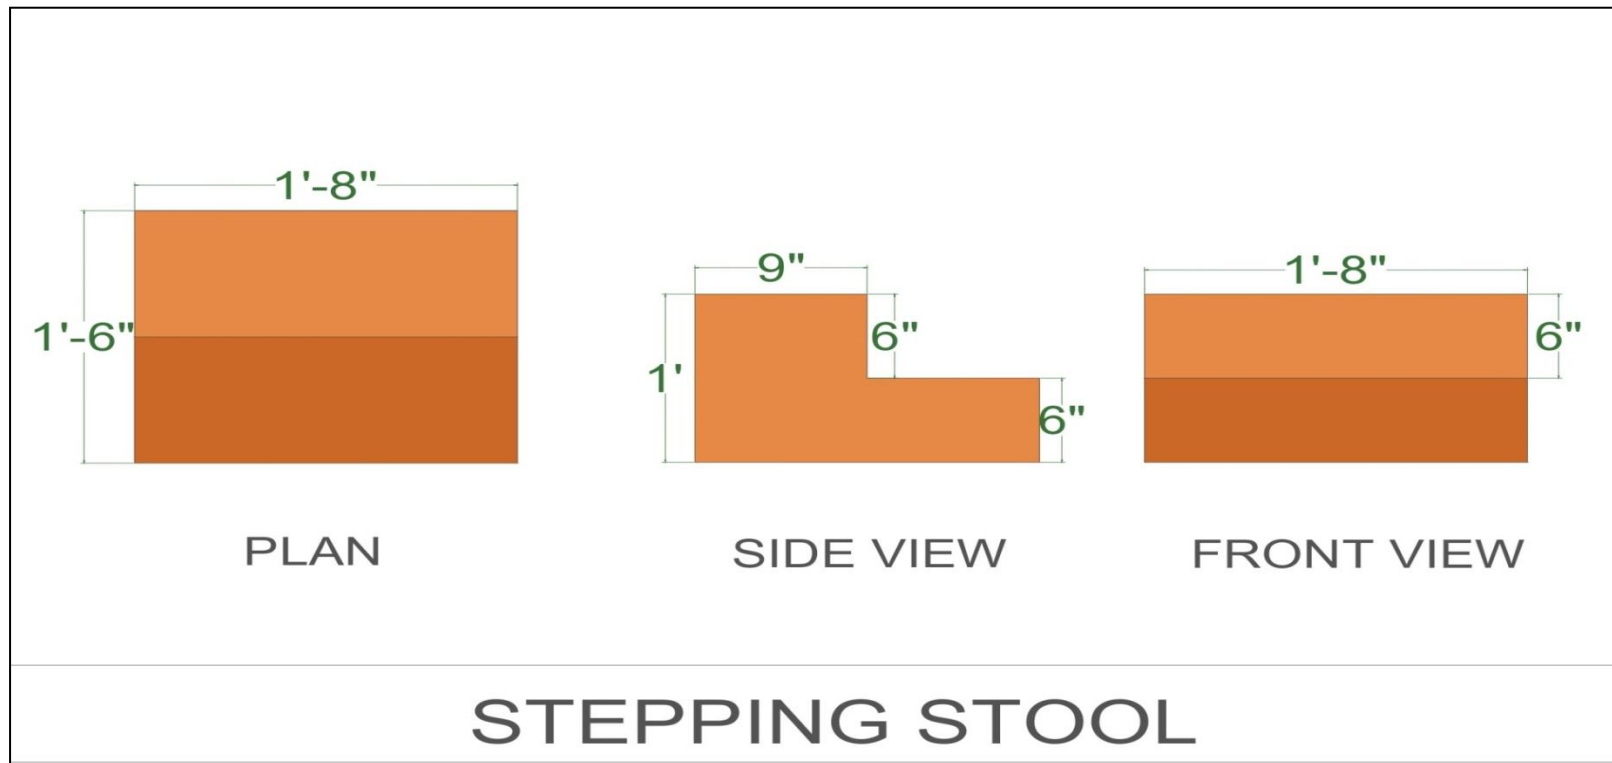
Plan, Elevation of Proposed Stepping Stool Design
